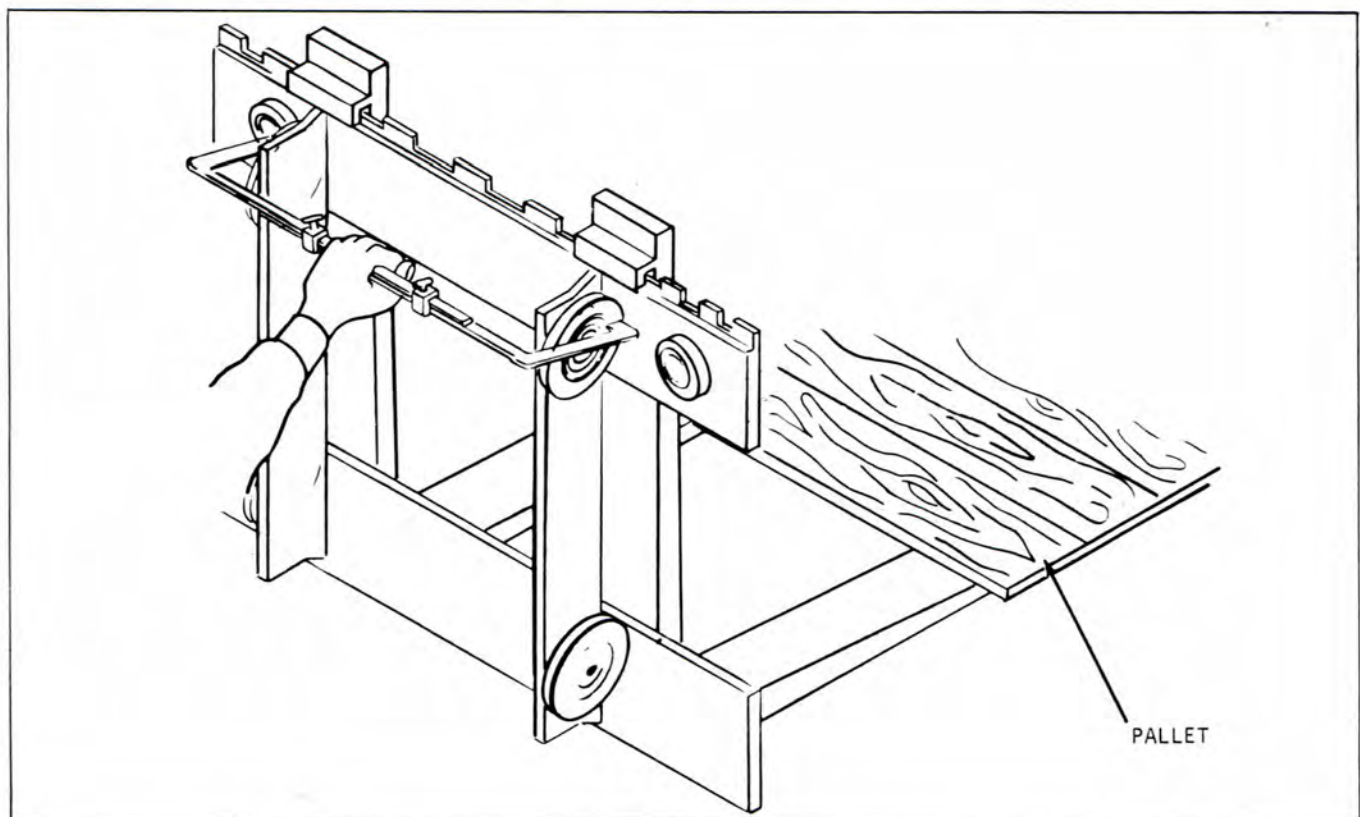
Spanning Upper Rollers (Four Roller Carriage)
